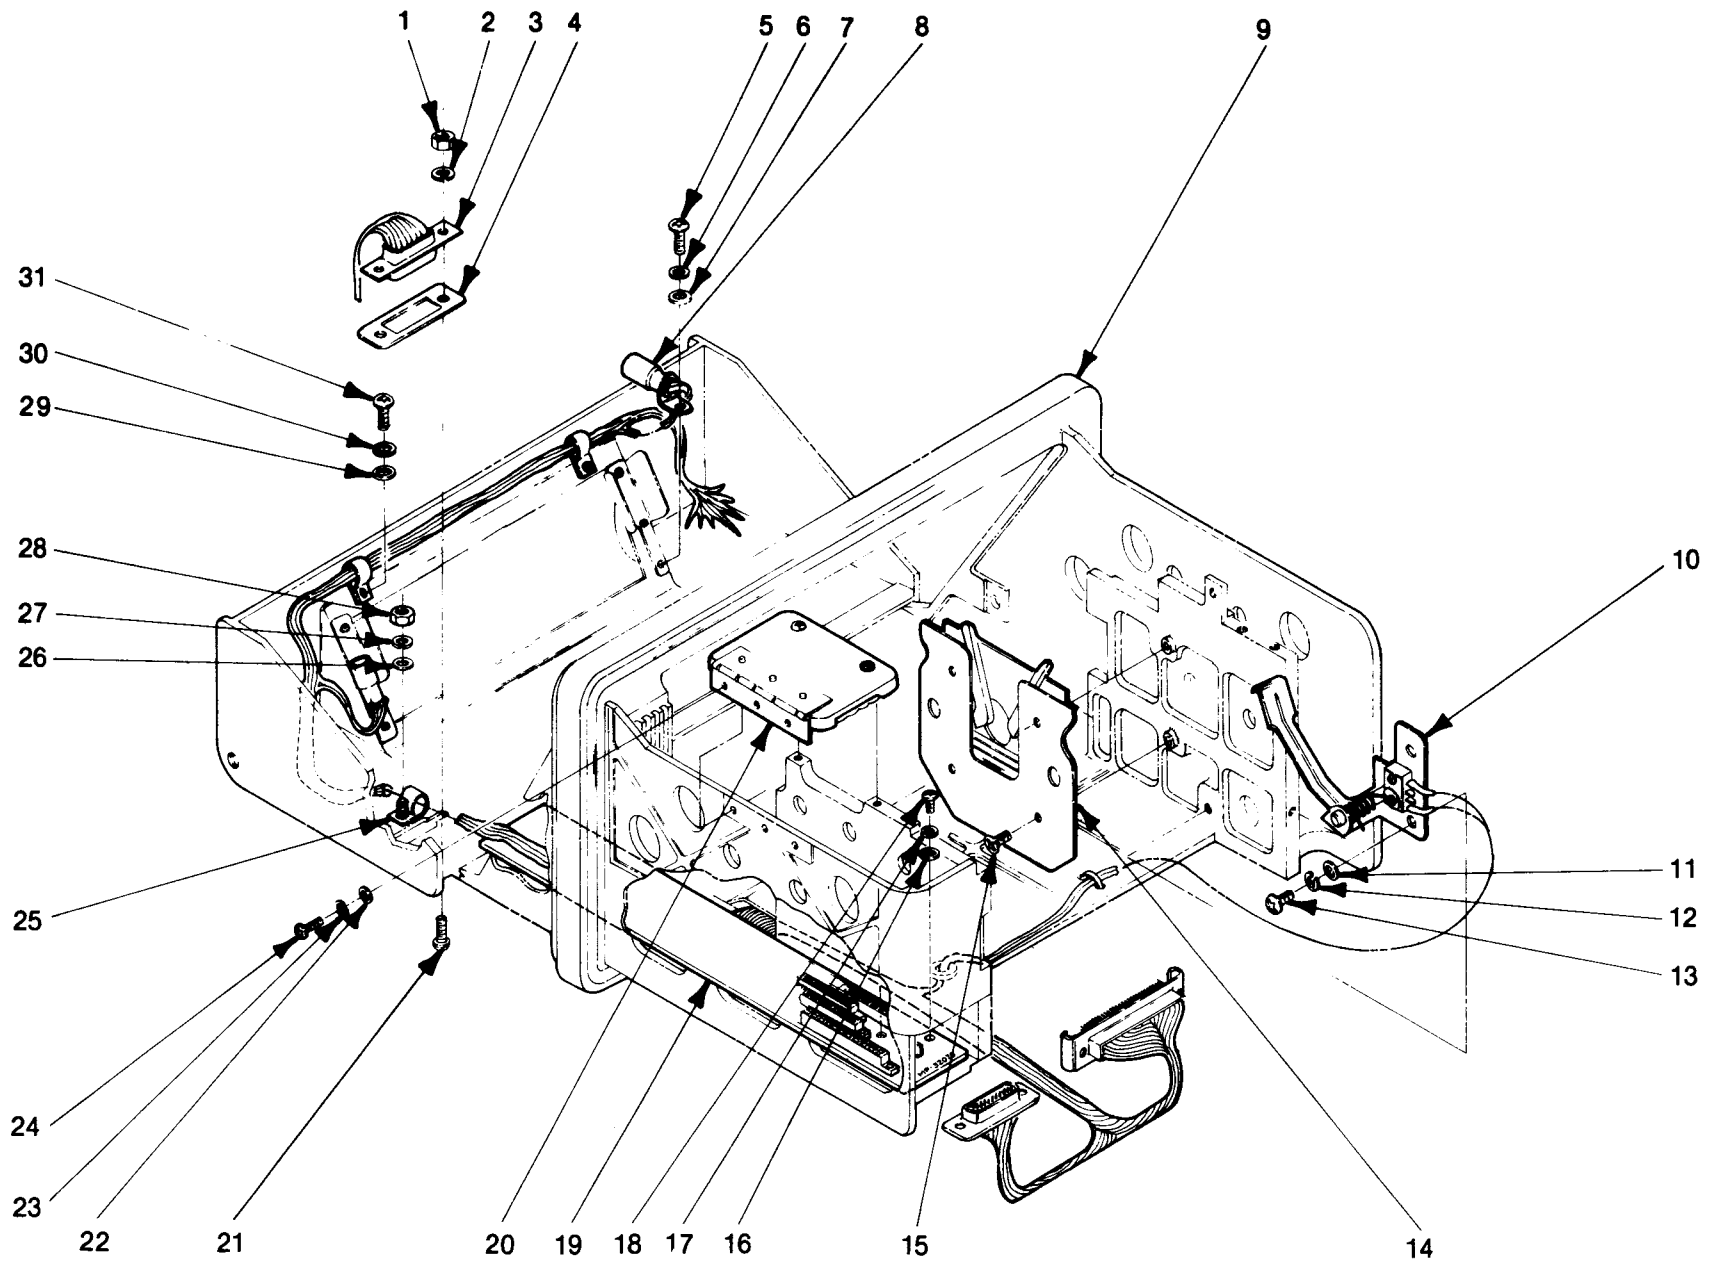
HARNESS ASSEMBLY REMOVAL AND REPLACEMENT.
